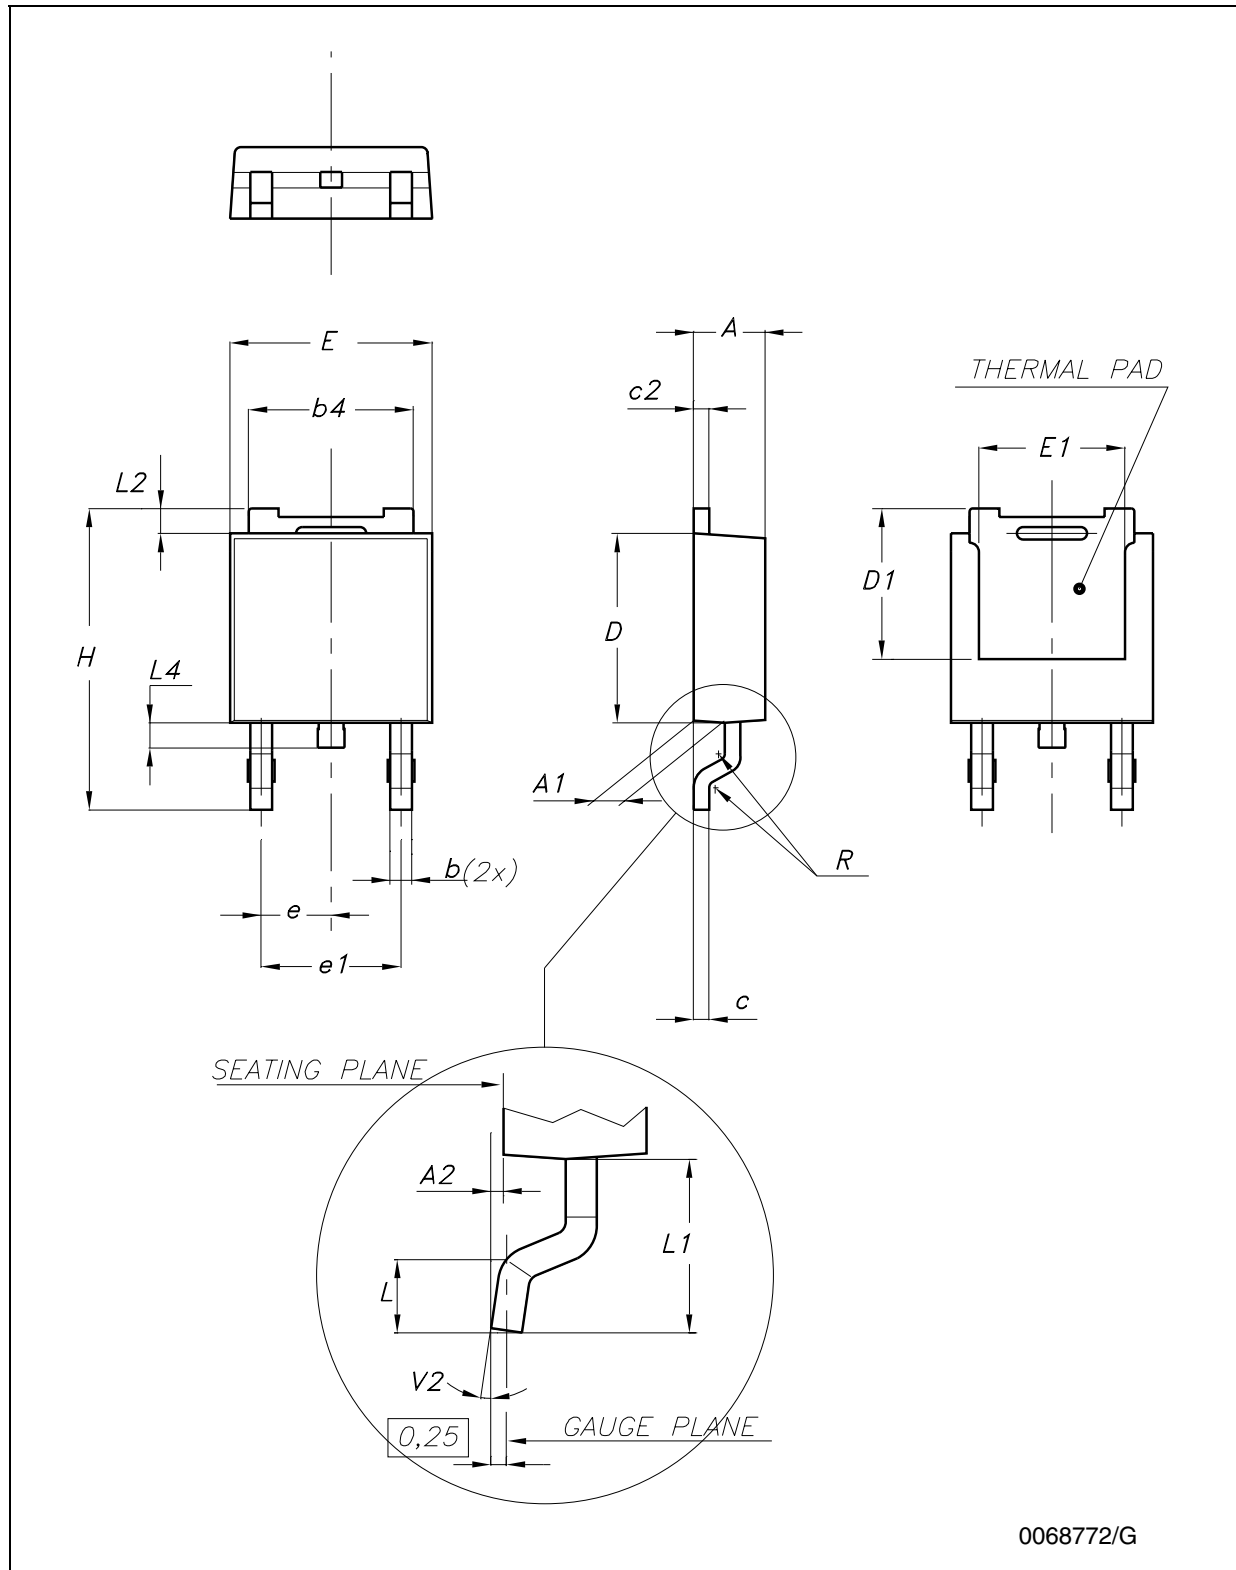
Drawing dimension DPAK (type FUJITSU-subcon.)
